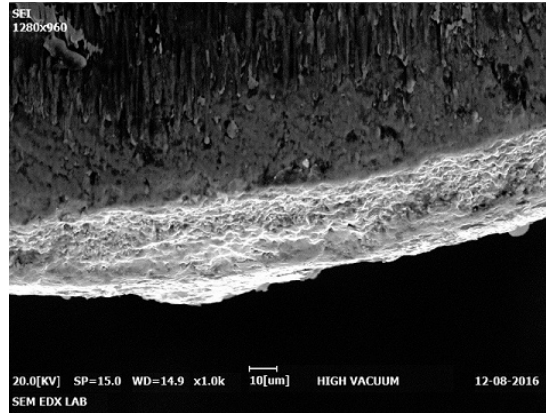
SEM Views of worn-out inserts under dry condition with cutting length of 90 mm and machining duration 5 min (cutting speed-70.37 m/min and feed-0.150 mm/tooth)
